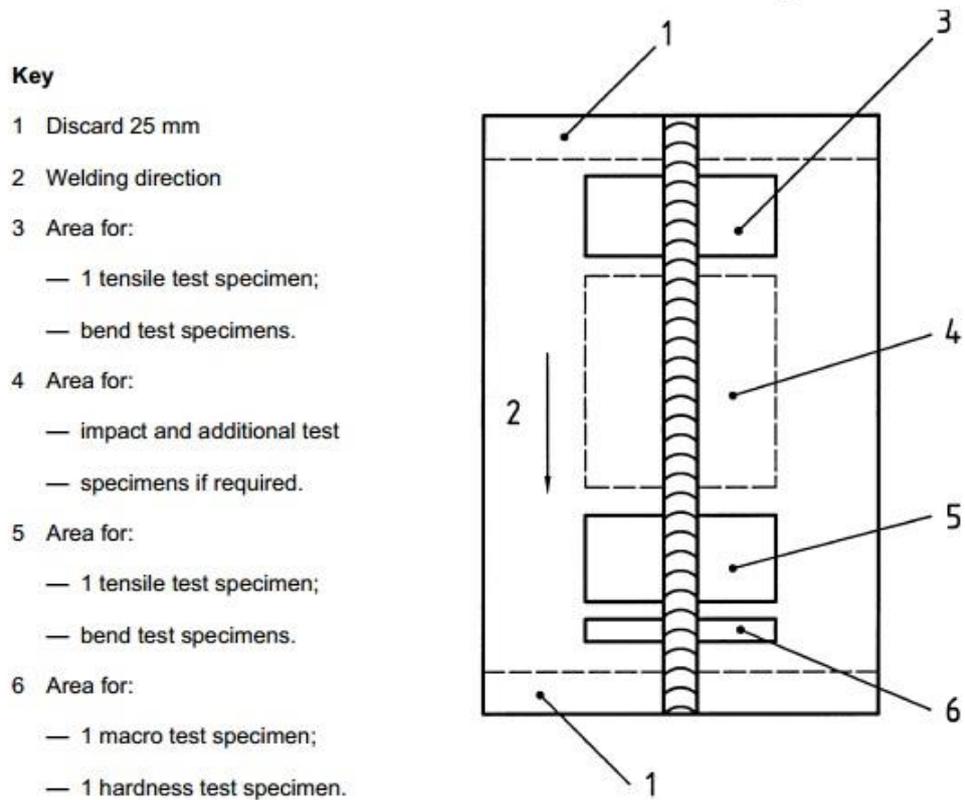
Test specimen locations of butt joint in plate (replotted from SFS-EN ISO 15614-1, p. 23)
